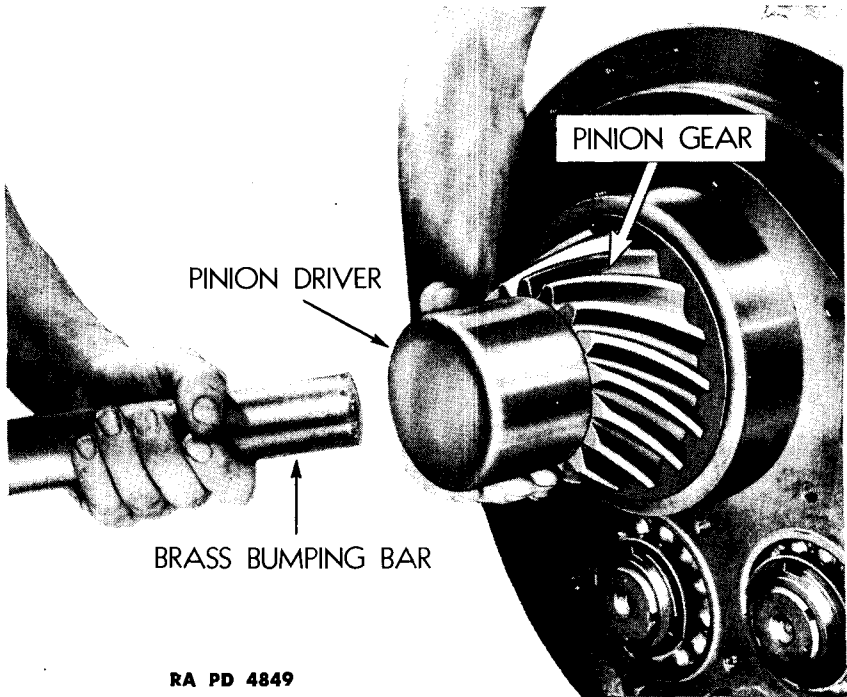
PINION GEAR BEING DRIVEN INTO POSITION
